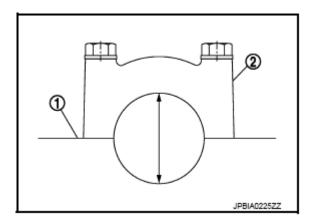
Identifying Main Bearing Housing Inner Diameter Courtesy of NISSAN NORTH AMERICA, INC.
